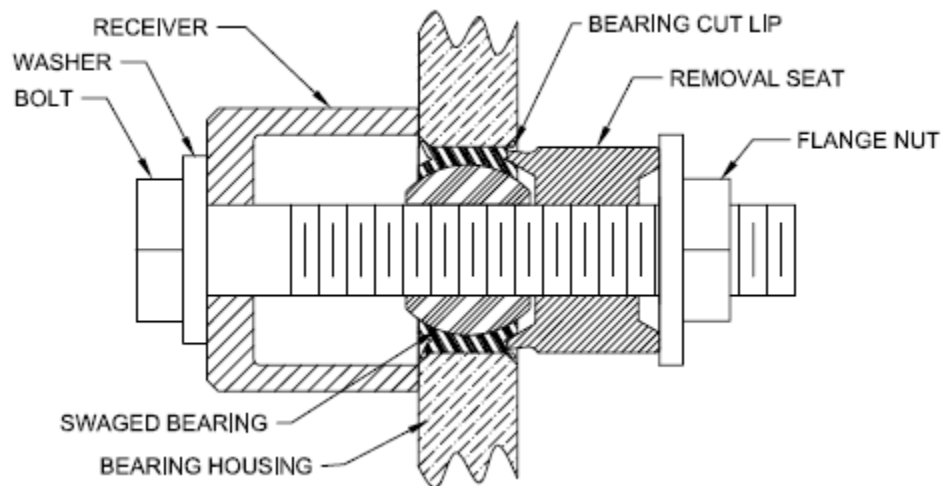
RBIR## BEARING INSTALL & REMOVAL TOOL:
